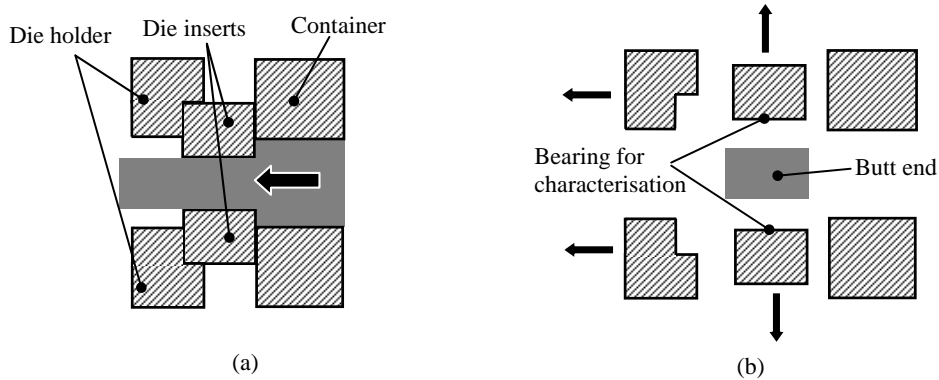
Operation of split die: (a) During extrusion the die inserts are assembled; (b) After extrusion the die holder and container retrieve, the die inserts are split up vertically.
